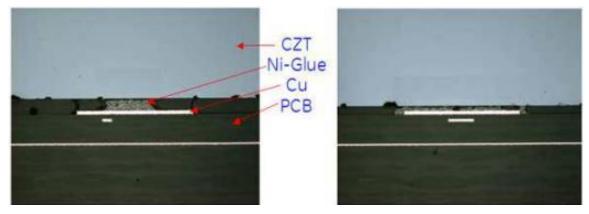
Cross-section through the bonds of a CZT detector with thick (left) and thin (right) layer of adhesive due to PCB warpage
